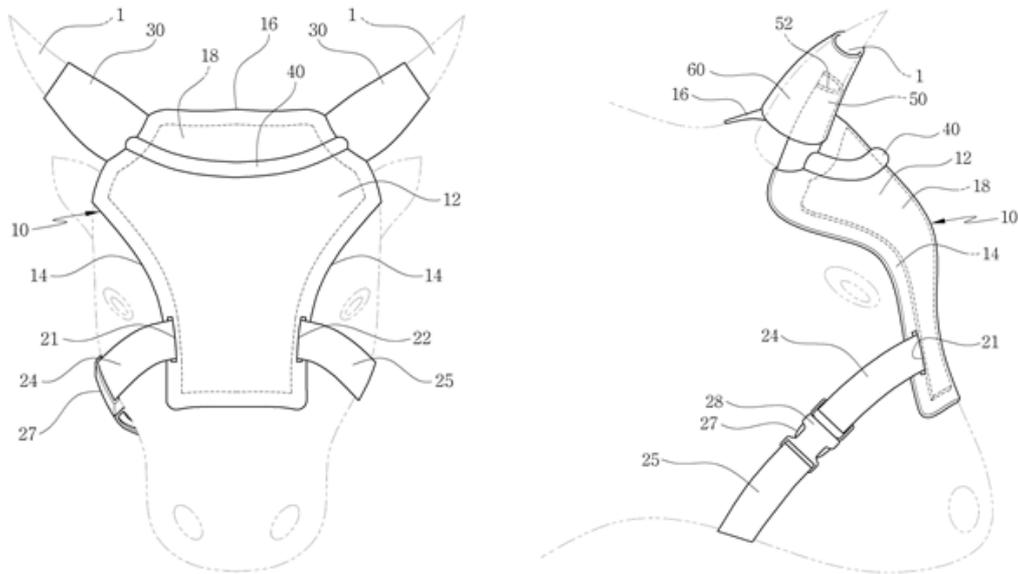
Design drawing for the fabrication of a headgear for fighting bulls. 1. Horn, 10. Front mask, 30. Horns support, 12. Front blocking unit, 14. Side blocking unit, 16. Rear blocking unit, 18. Buffer unit, 21, 22. Guards hole, 24, 25. Chin strap, 27. Male lace-fastening tool, 28. Female lace-fastening tool, 40. Reinforcing rib, 52. Open area, 60. Horn Reinforcing support, 50. Horns support.
